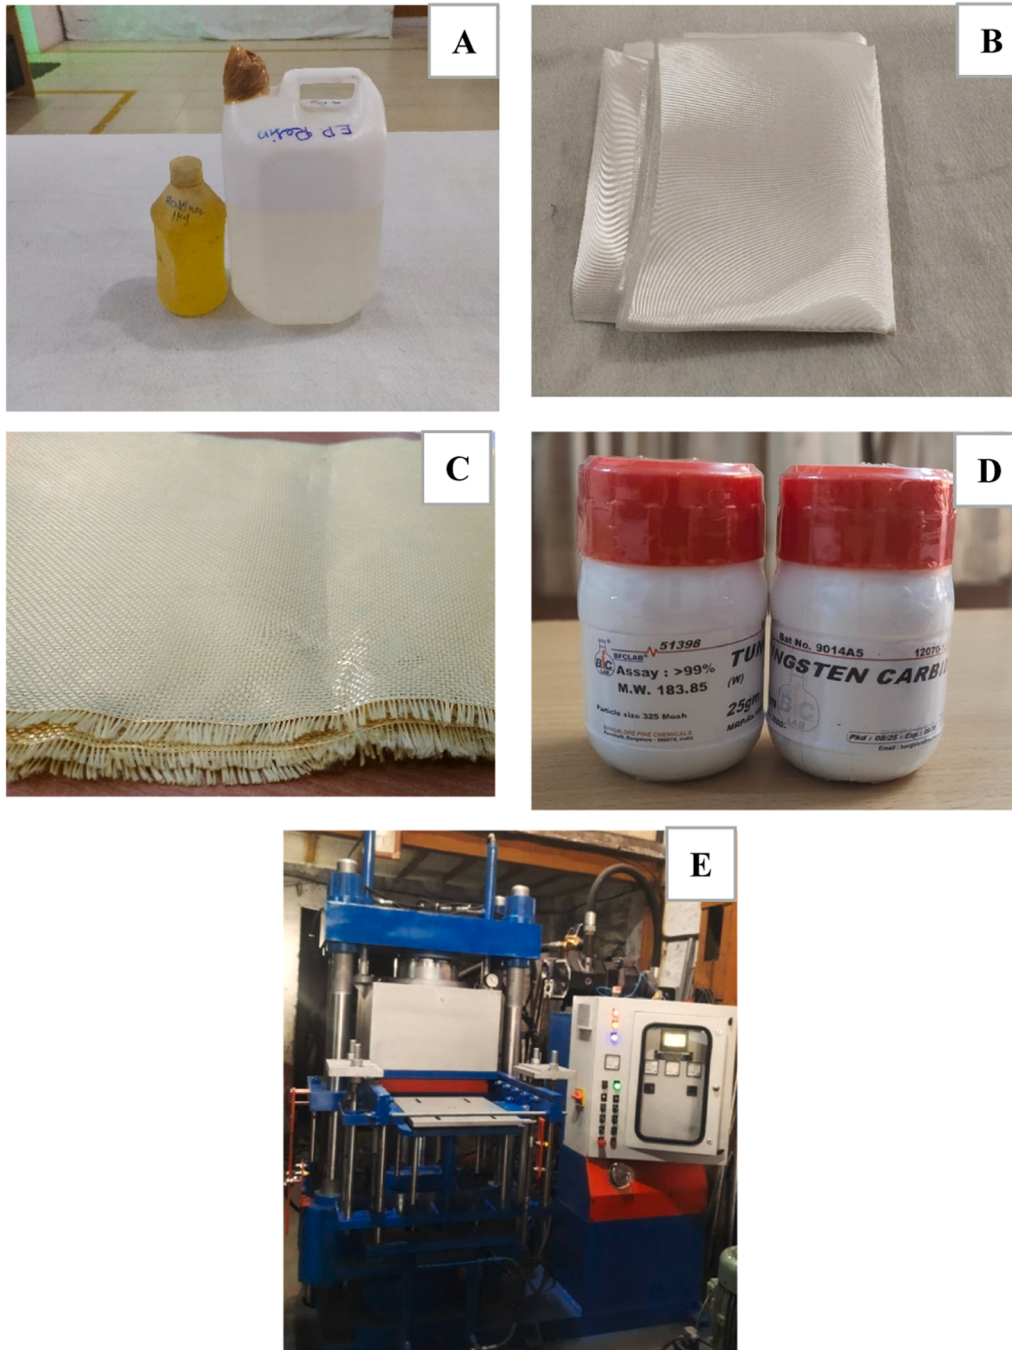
Constituent raw materials and fabrication equipment: (A) Araldite LY 556 epoxy resin and HY 951 hardener; (B) S2-glass plain-weave fabric; (C) Kevlar 29 plain-weave fabric; (D) tungsten carbide micro-powder; (E) hot-press compression moulding system.
